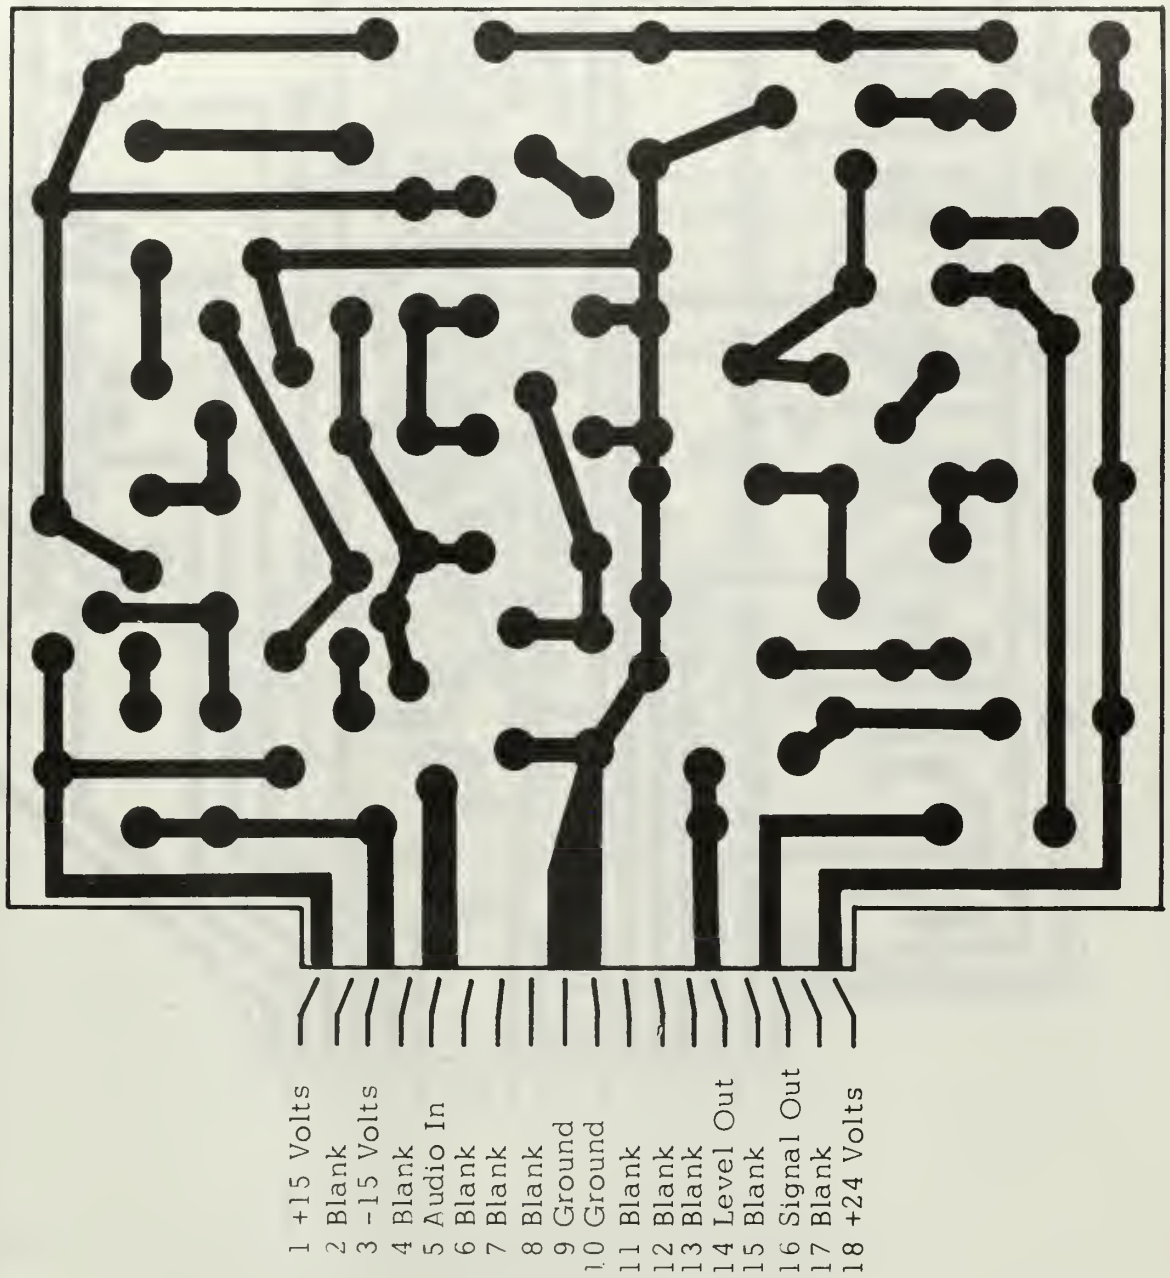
Filter Card. Contains active filter on the left, and buffer amplifier, detector, and threshold switch on the right. View is from copper side of board.
